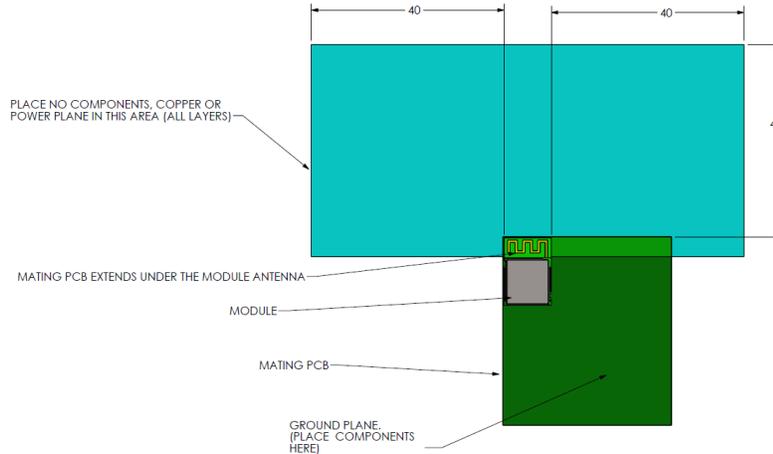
N5 M8 Module Mounting (all dimensions in mm)
